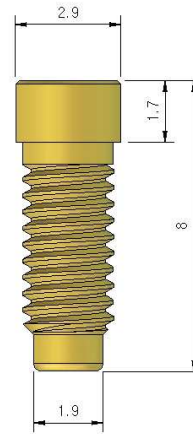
Dimension of implant screw (ϕ 5.1 mm implant)
